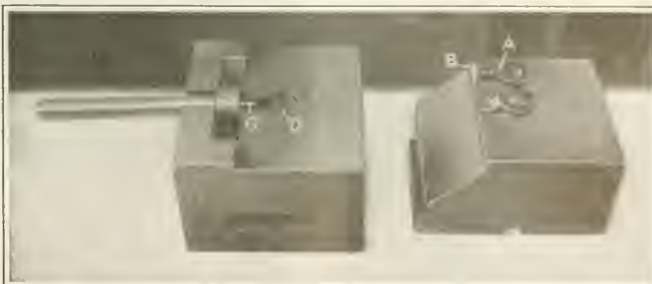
Pair of Dies used for pressing Electrical Cable End from a Copper Blank. Piece made in Die is shown at A
